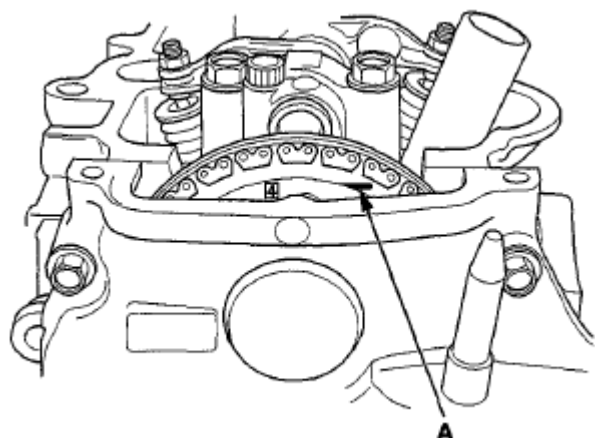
Identifying Punch Mark On Variable Valve Timing Control (VTC) Actuator
